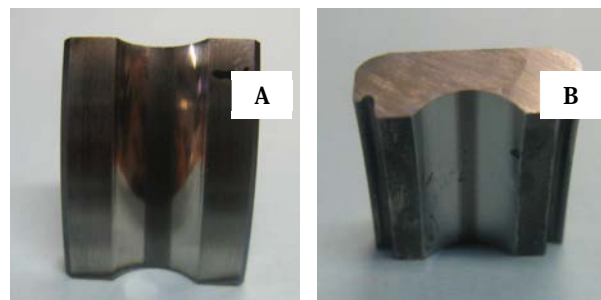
Smearing in a deep groove ball bearing inner race (A) and outer race (B)
